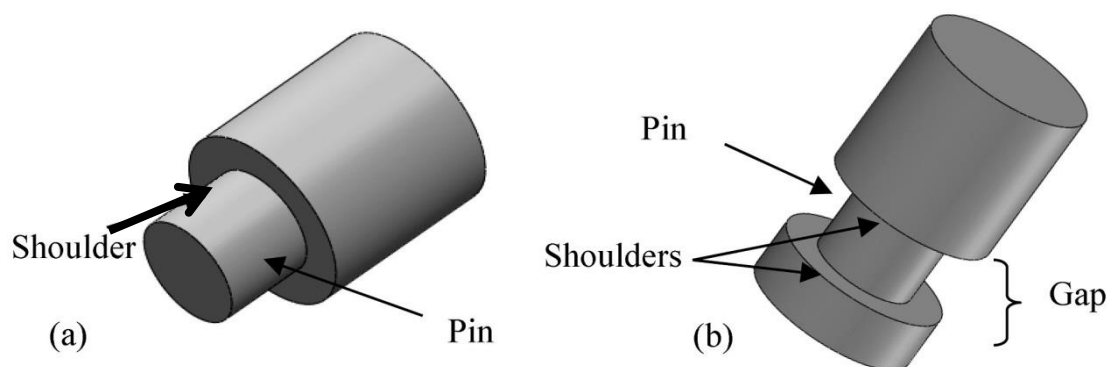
Schematic of the FSW tool; (a) Conventional-FSW tool, (b) Bobbin-tool (Courtesy K Sued).
